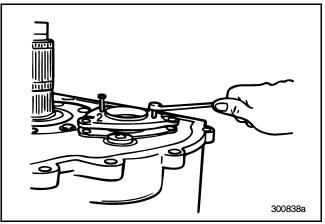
Removing No. 2 Front Countershaft Rear Bearing Cover (T313L/T318L Shown)
